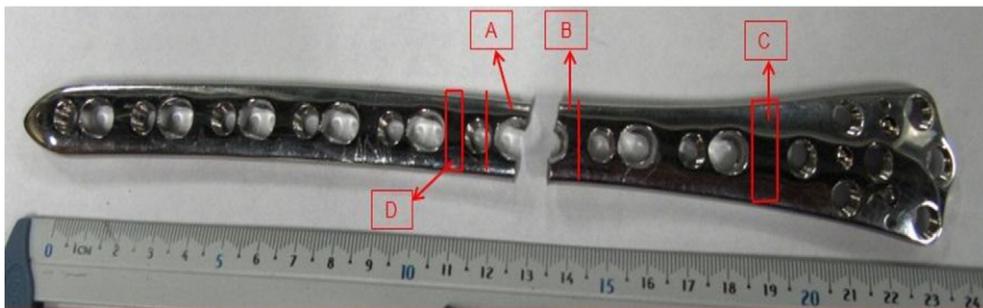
Supracondylar plate showing the transversal fracture through one of the holes. Sections A, B, C and D were used to the chemical and metallographic material characterization and fractographic analysis.
